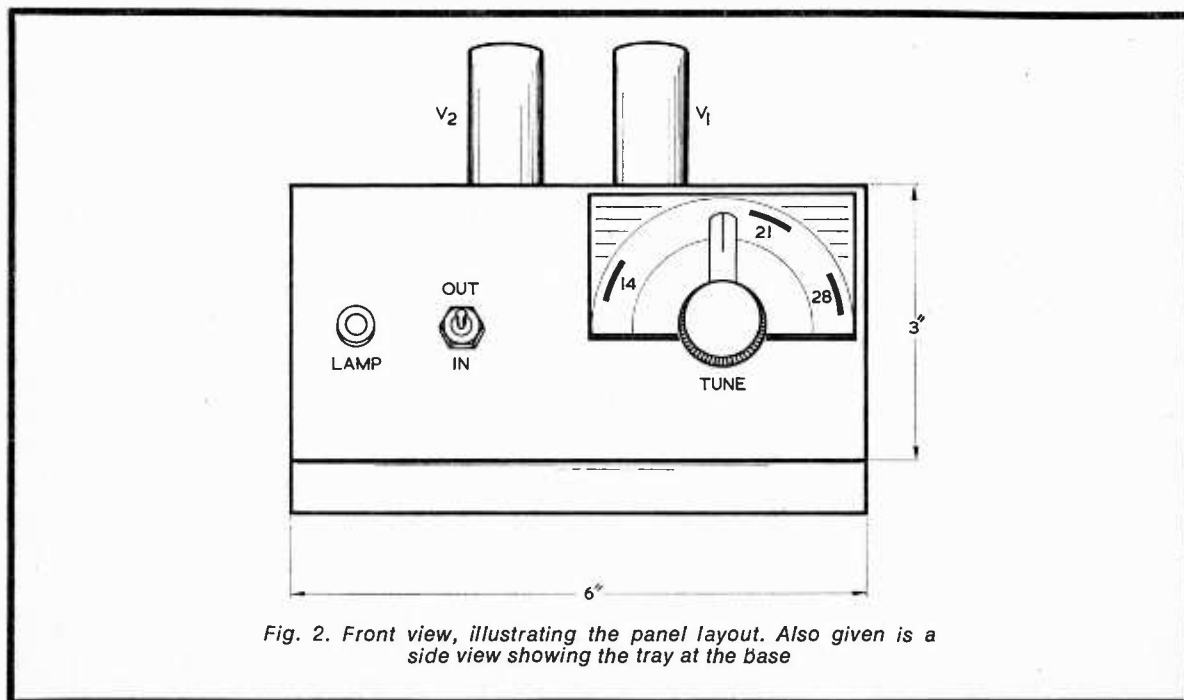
Front view, illustrating the panel layout. Also given is a side view showing the tray at the base
